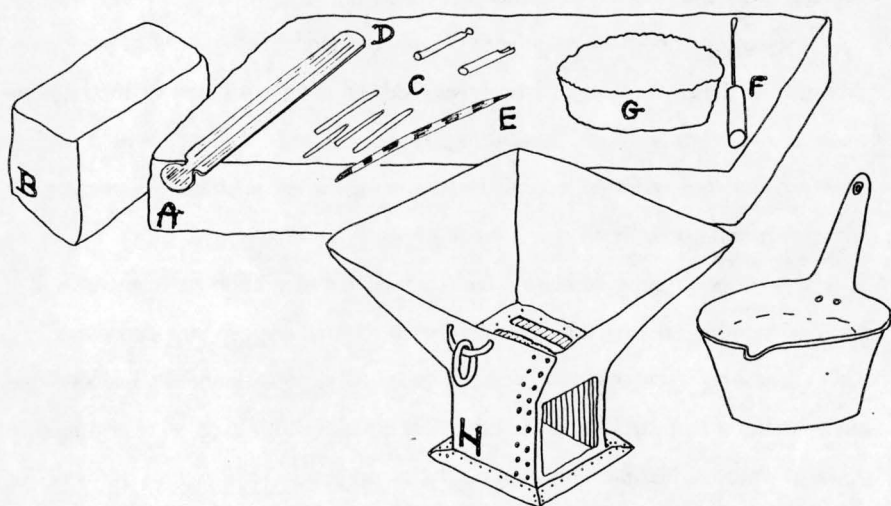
Minimum equipment required for working in wax: (A) workboard and (B) block with (C) set of bamboo modelling tools, (D) bamboo paddle, (E) porcupine quill, (F) iron rod, (G) beeswax, (H) charcoal burner.
